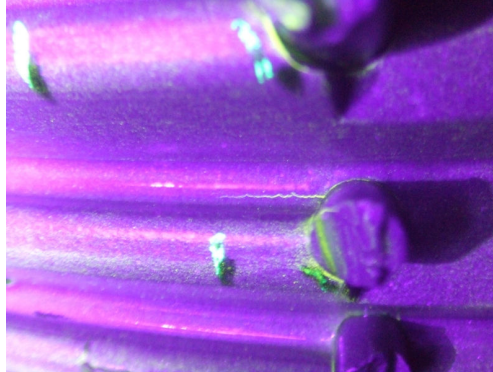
Crack identified using fluorescent magnetic particle inspection.
